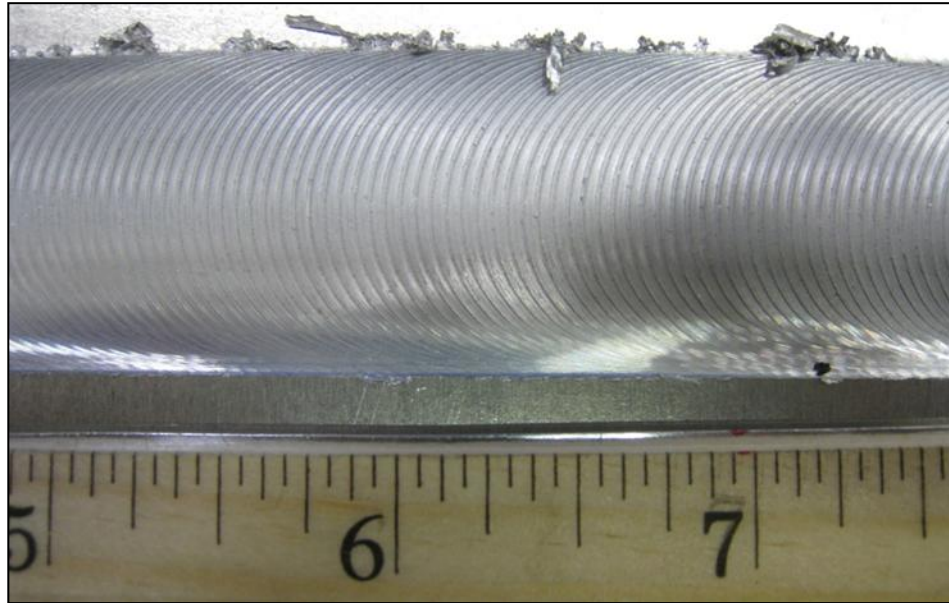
Friction stir welded joint. A semicircular pattern is observed in the crown of a conventional friction stir welded joint.
